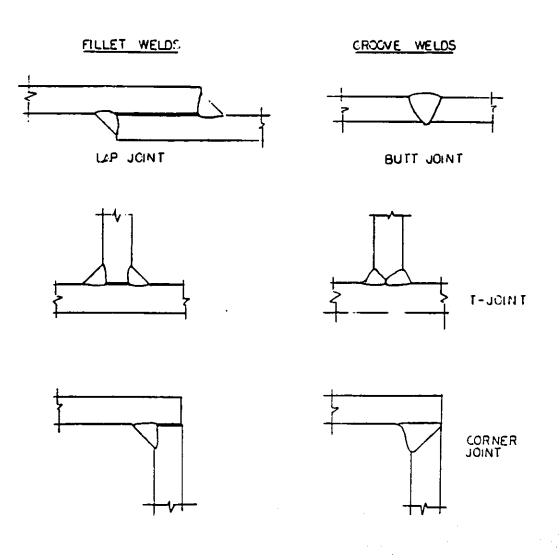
FILLET & GROOVE WELDS IN COMMON JOINT ARRANGEMENTS
